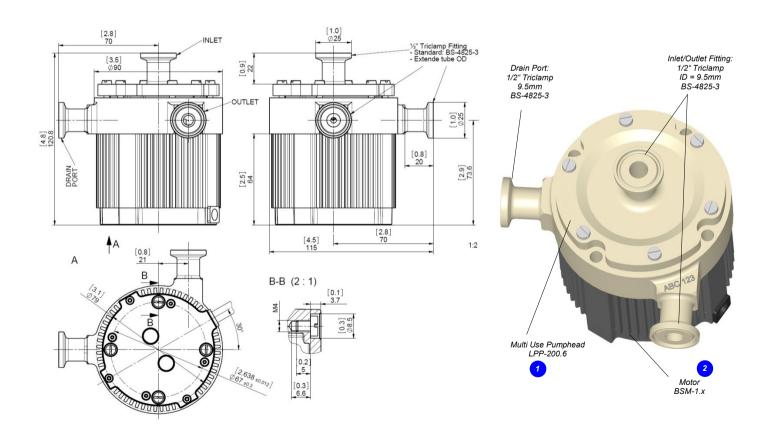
Dimensions of motor with multi-use pumphead in mm and [inch]
